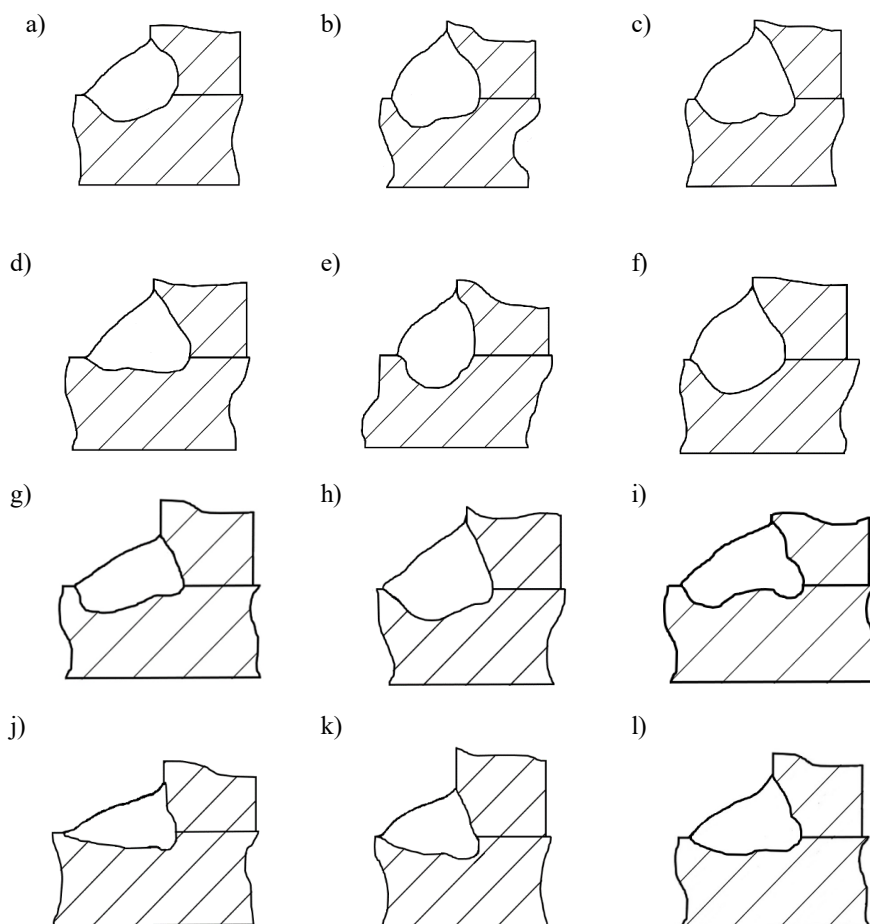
Welding seam form and shape of Penetration of the welded samples: M25 – a) 280 A, b) 300 A, c) 320 A; M18 – d), e), f); M8 – g), h), i); C3 – j), k), l).
